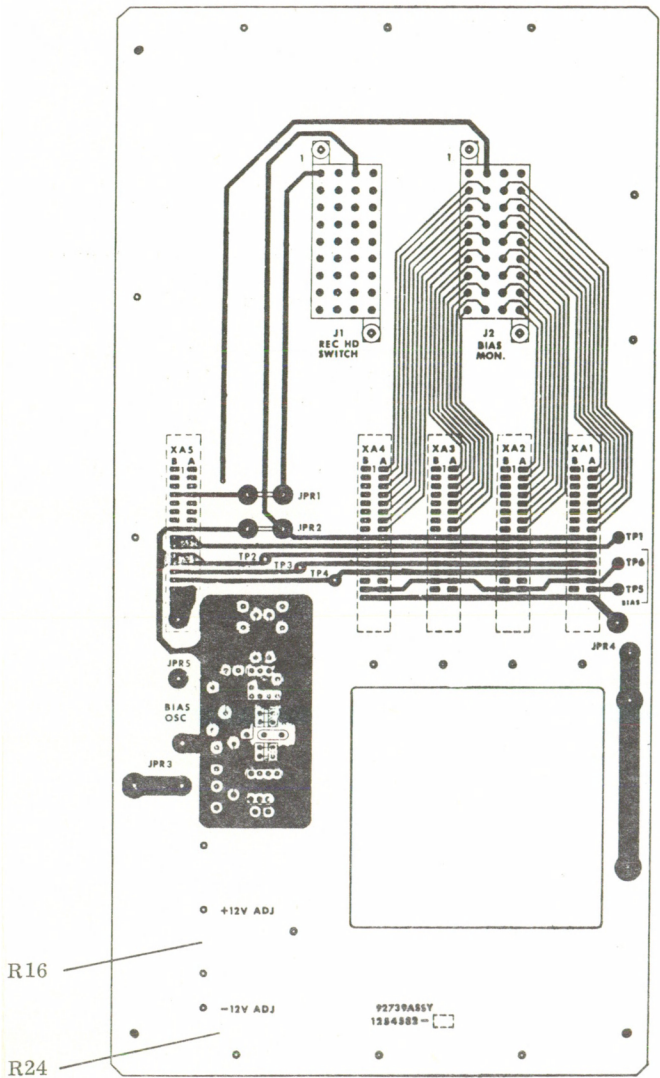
Headdriver Housing - Rear View - Showing Power Supply Adjustment
